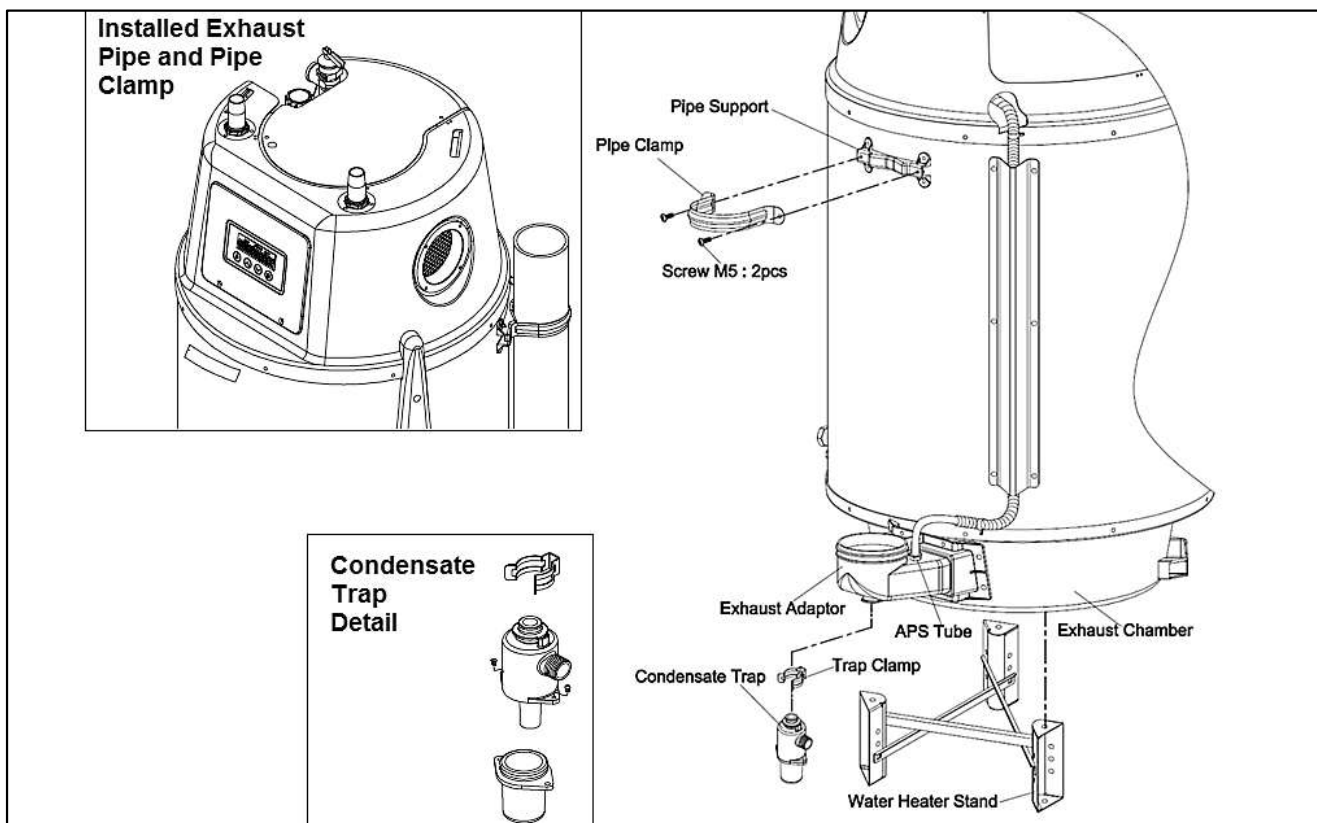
Installing the Water Heater Exhaust Pipe Clamp, Condensate Trap, and Setting the Water Heater on the Stand
